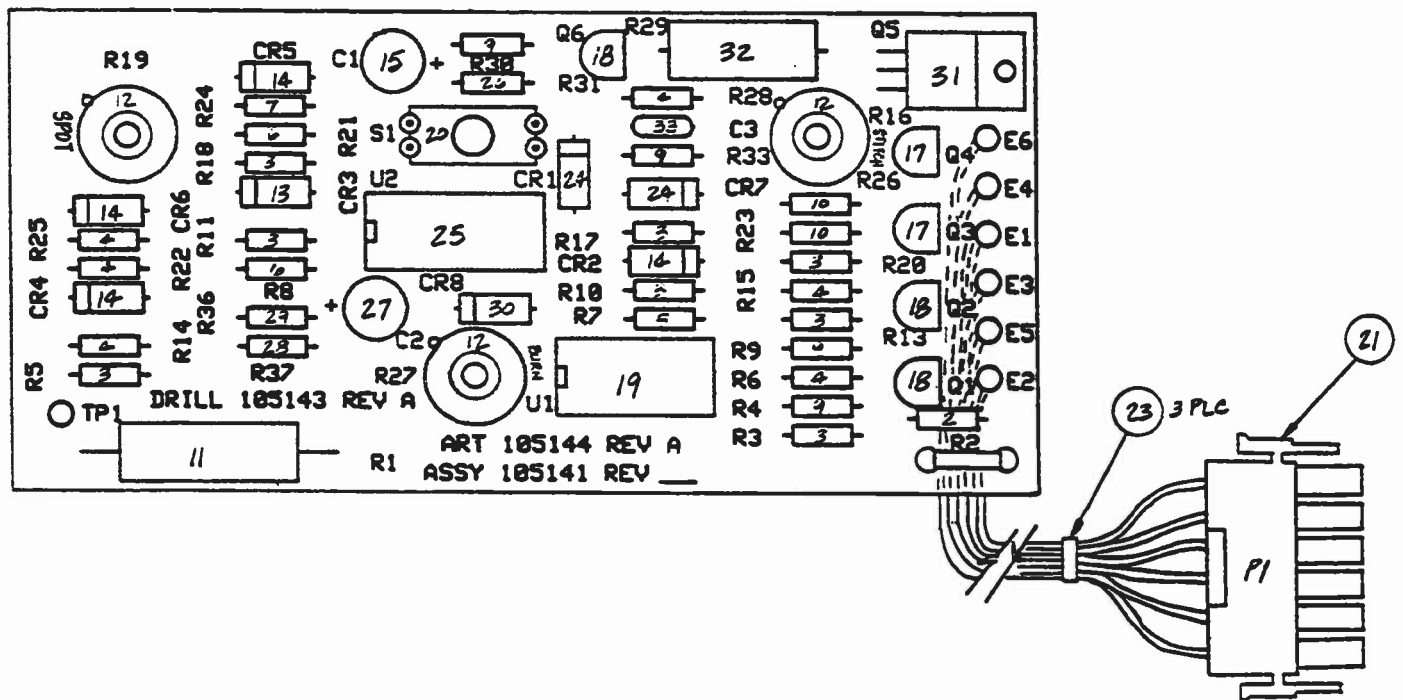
, PCB SP/ST/BB Assembly, PDI/E
